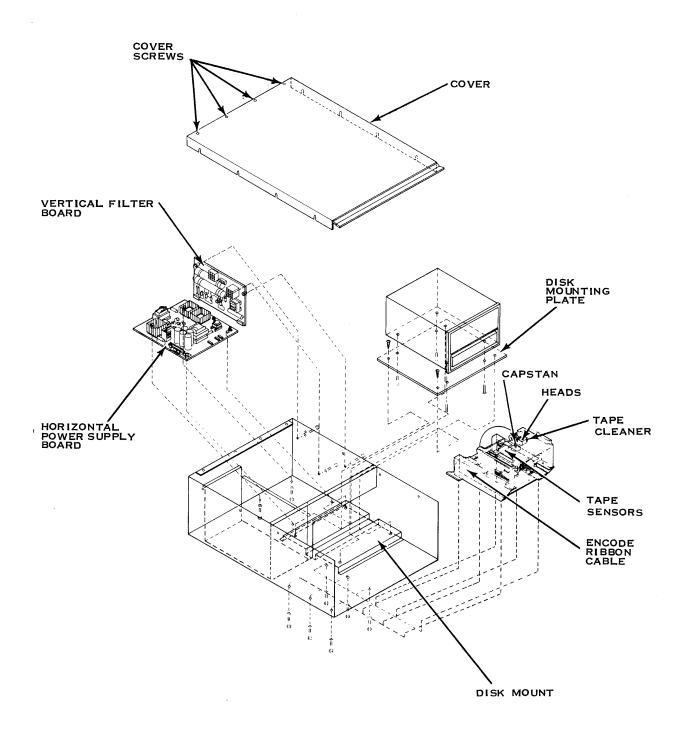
WD800A Mass Storage System — Exploded View (Sheet 1 of 3)
